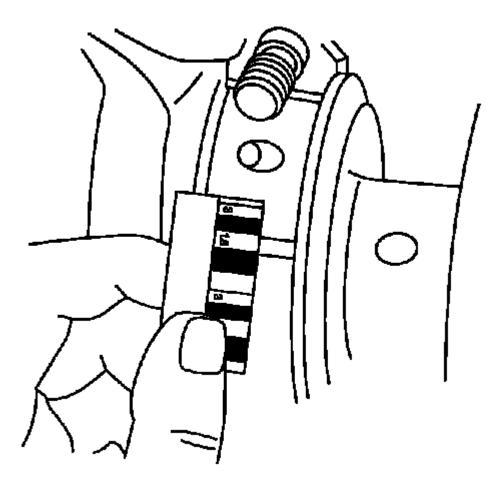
Measuring Crankshaft Bearing Journal Diameter Courtesy of GENERAL MOTORS CORP.
